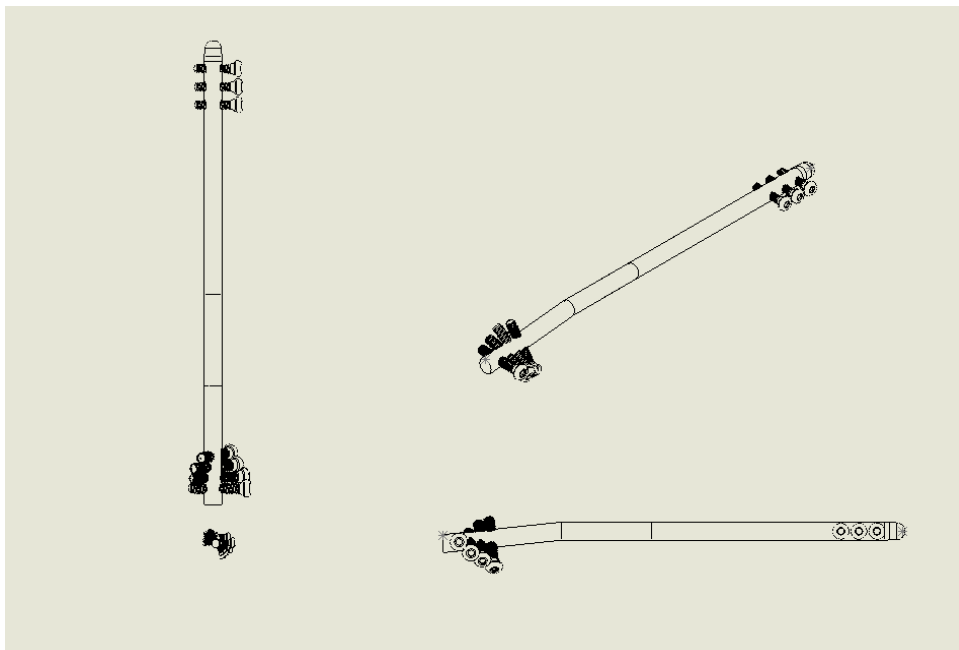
Units in Millimeters. Dimensions of the Accurod
